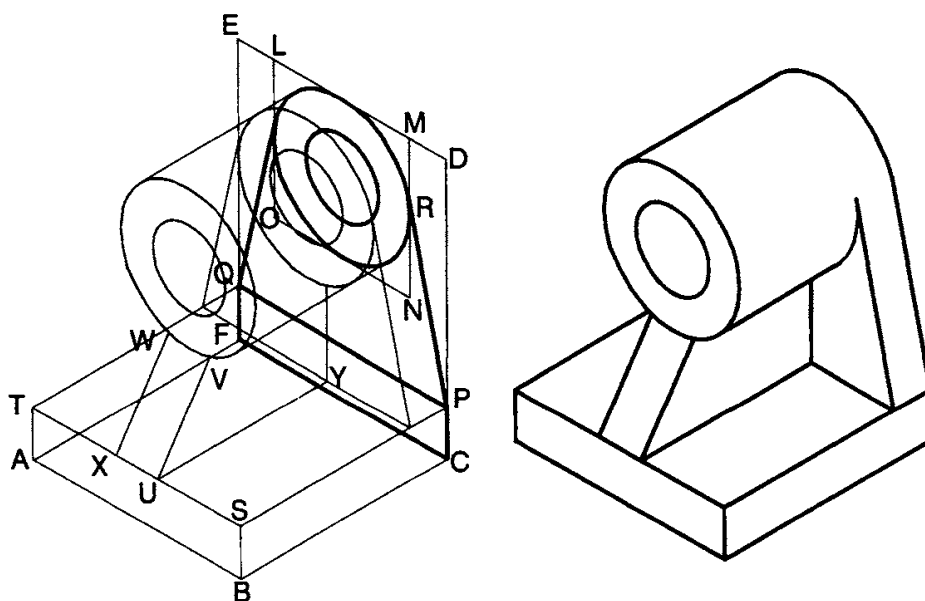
Example of the method of drawing an isometric projection bearing bracket
